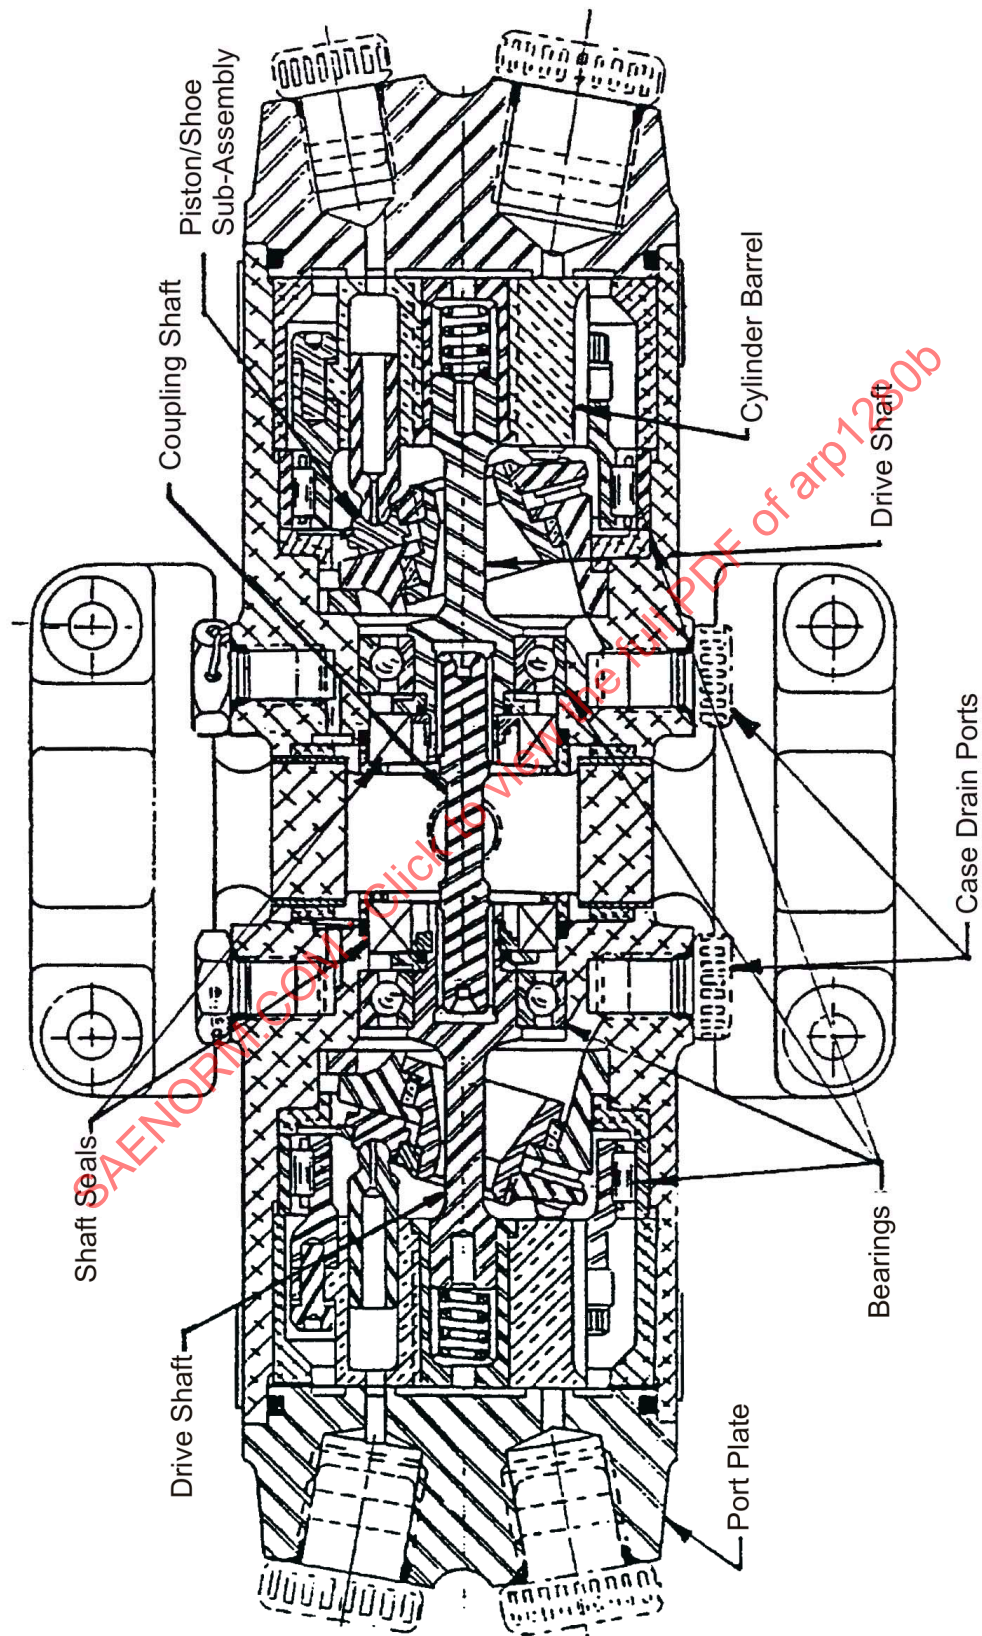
CROSS SECTION OF A TYPICAL INLINE DESIGN PTU
